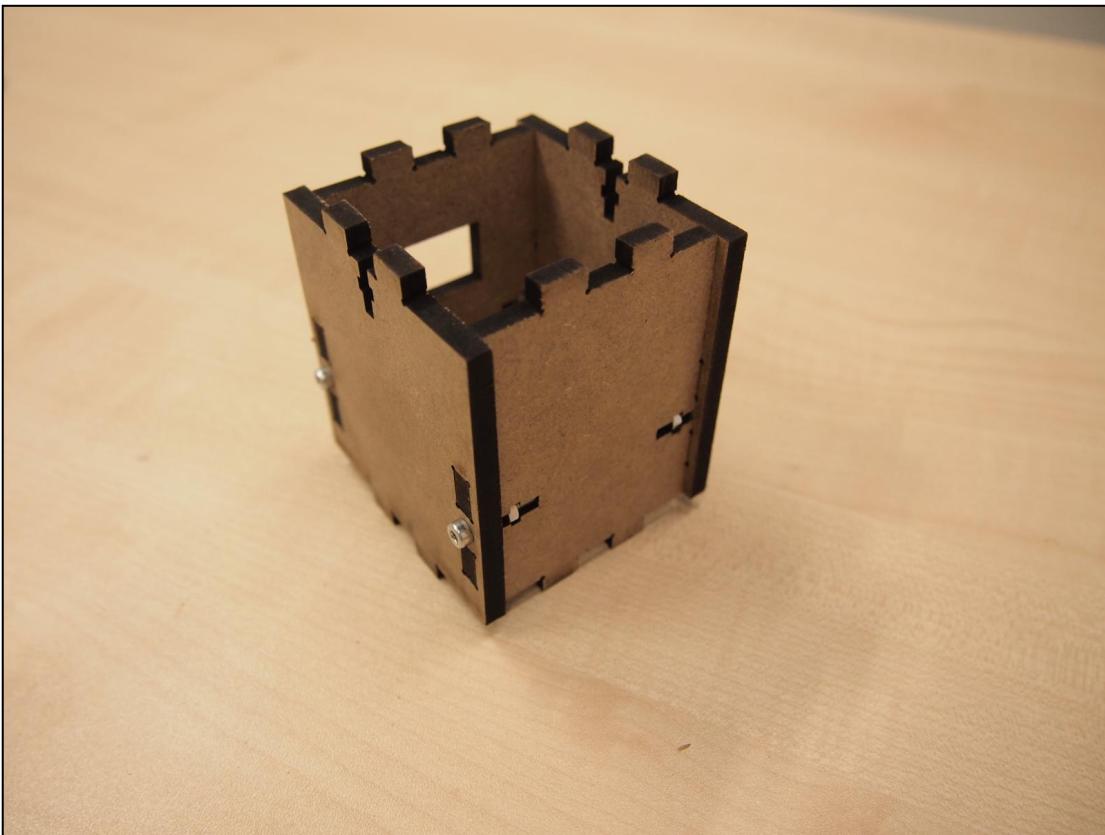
Use four DIN 912 M3x16 screws and nuts to secure the housing.
